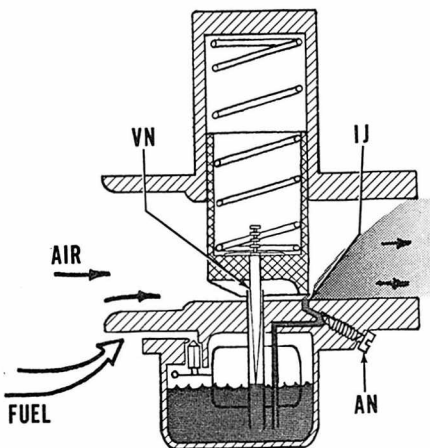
With throttle slide lowered to idle speed position, only a small amount of air is allowed to pass. The valve needle (VN) is lowered, closing the main jet and fuel is drawn from the idle jet (IJ). Idle mixture adjustment needle (AN) controls fuel-air ratio.
